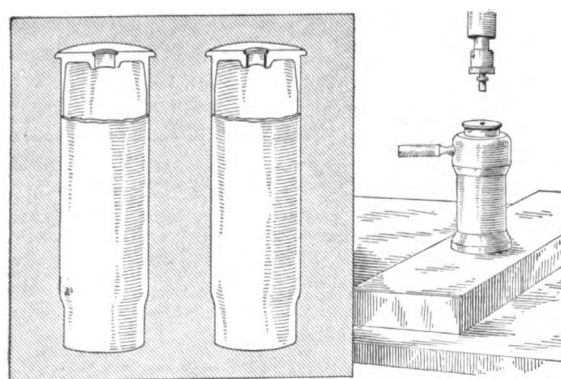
OPERATION 23: FINISH MACHINING PRIMER HOLE AND RECESS
